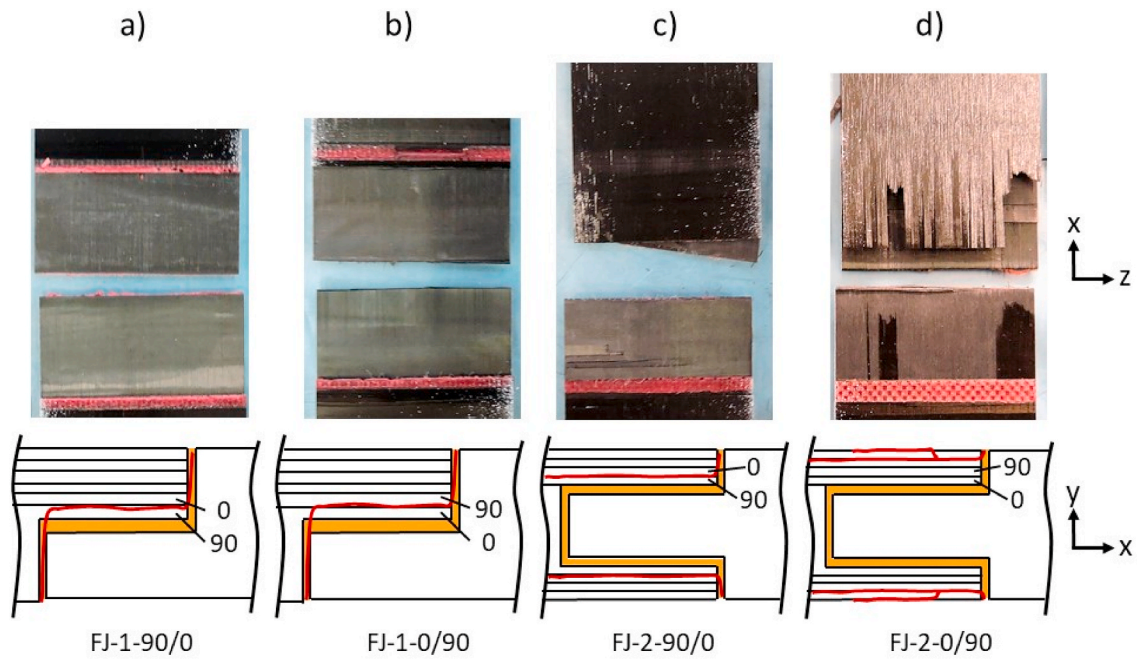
Final fracture surfaces of FJ-topologies with layout $[90/0]_{4s}$ (a–b) and layout $[0/90]_{4s}$ (c–d).
